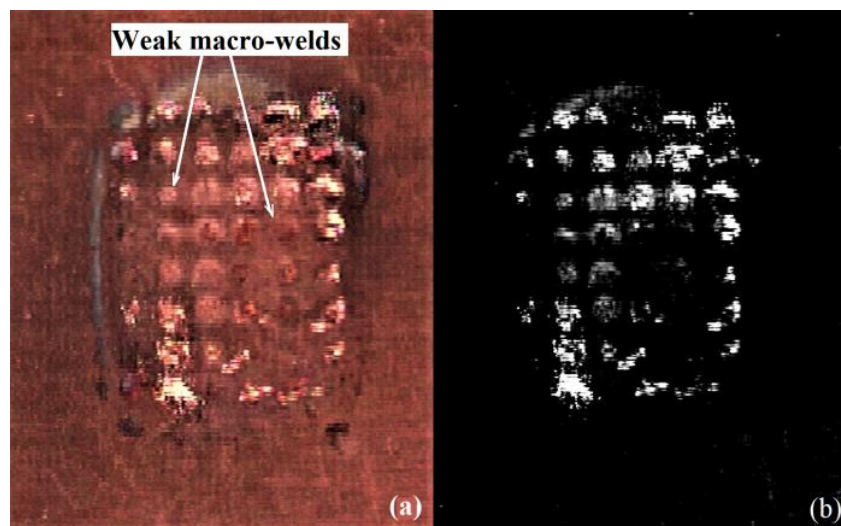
Enlarged view of weld interface (a) strong and weak macro-welds (b) the threshold image of the bonds used to calculate the area of the bonds
